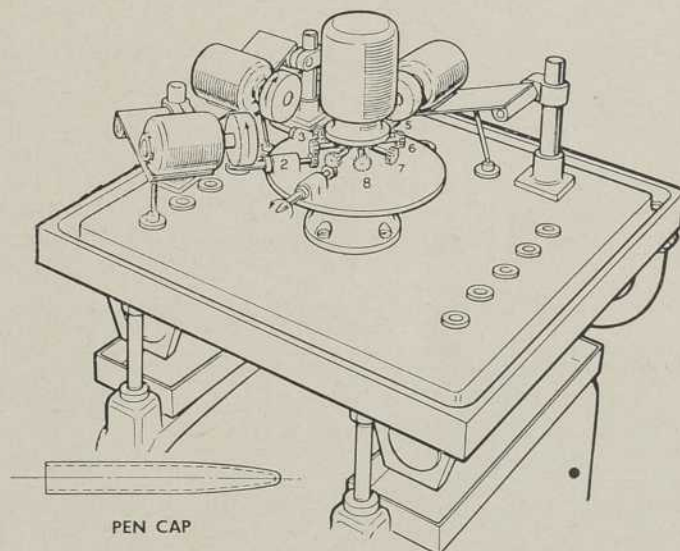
B—POLISHING MACHINE FOR PEN CAP AND BARREL; OUTPUT 3,060 PER HOUR.
